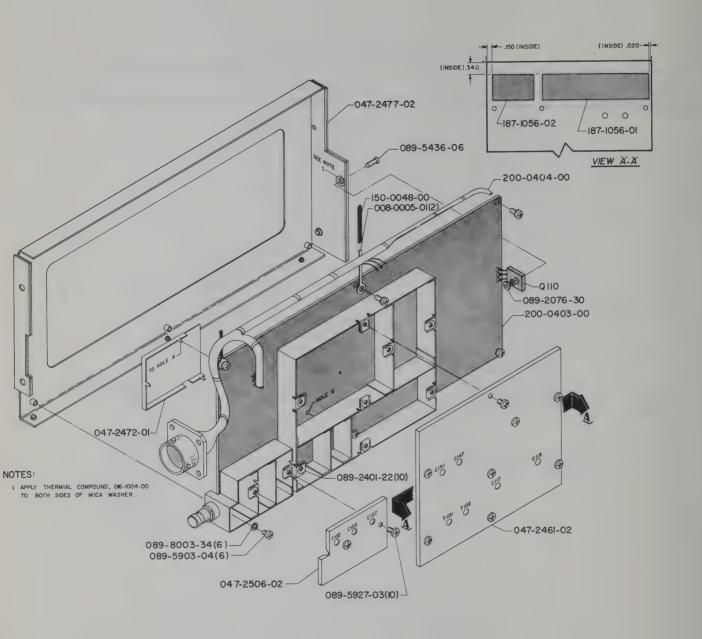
GLIDESLOPE CHASSIS ASSEMBLY
